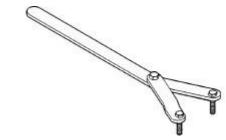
SPANNER WRENCH - 6958 Courtesy of CHRYSLER LLC
